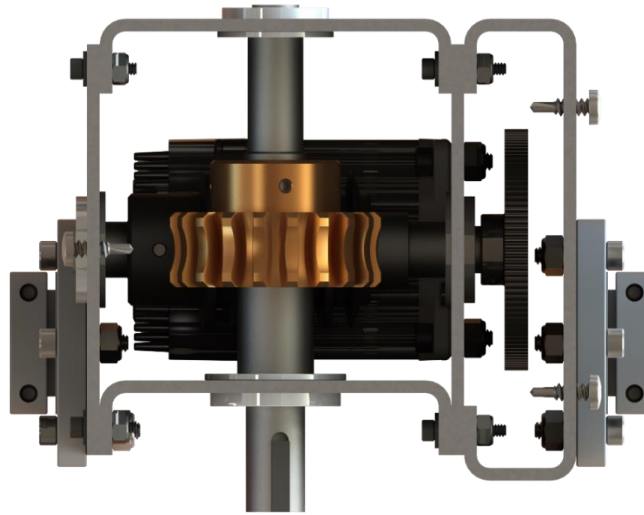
Above view of the rotational mechanism. The motor compartment and worm gear drive is on the left, and the spur gears are housed on the right separated by the inner wall².
